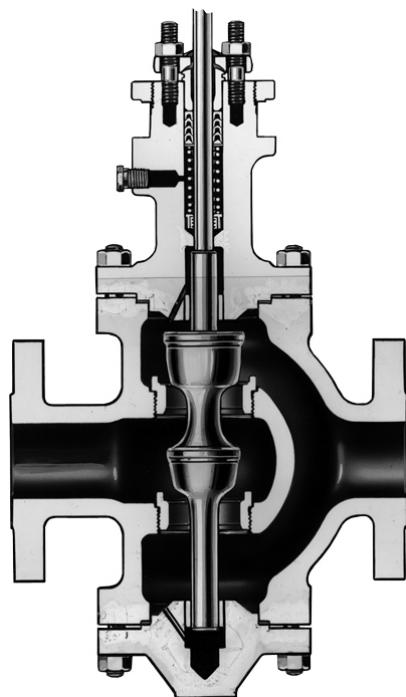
Cross-Section of a globe valve body assembly with a balance plug. Courtesy of Fisher-Rosemount.
